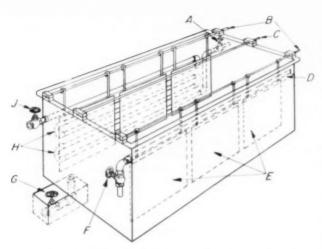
Electrolytic Cleaning Tank Equipped With Steam Heating Coils and Overflow Dam. Sheet steel electrodes (E) hang in front of coils and dam and have porcelain insulators at bottom to prevent contact with tank. (Courtesy Oakite Products, Inc.)
